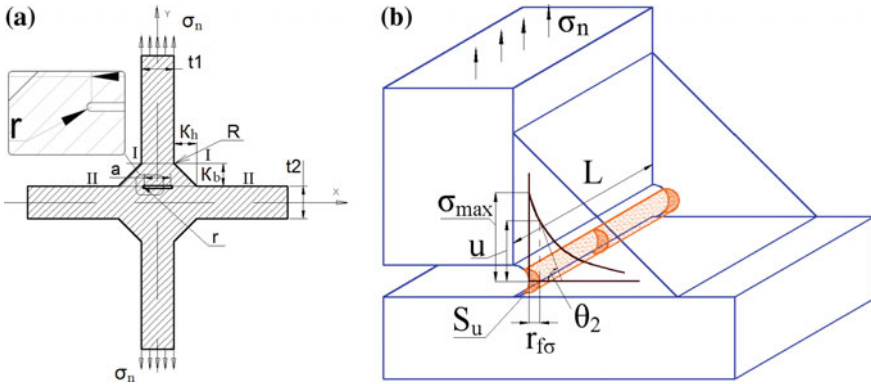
Geometric parameters and the cruciform weld joint loading scheme (a), scheme for defining the «dangerous» stresses zone (b)
